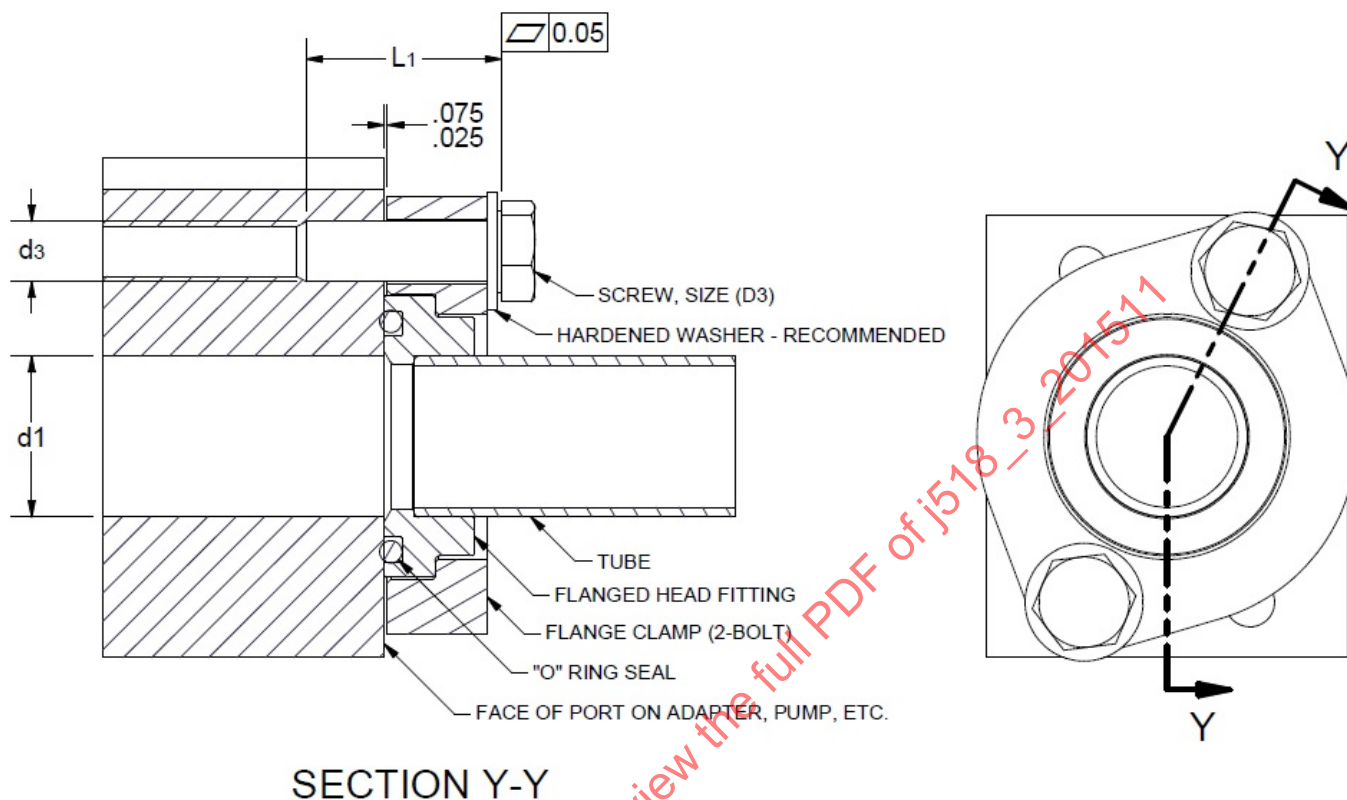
Assembly drawing – flange clamp, flange head, screws, washer, and port
